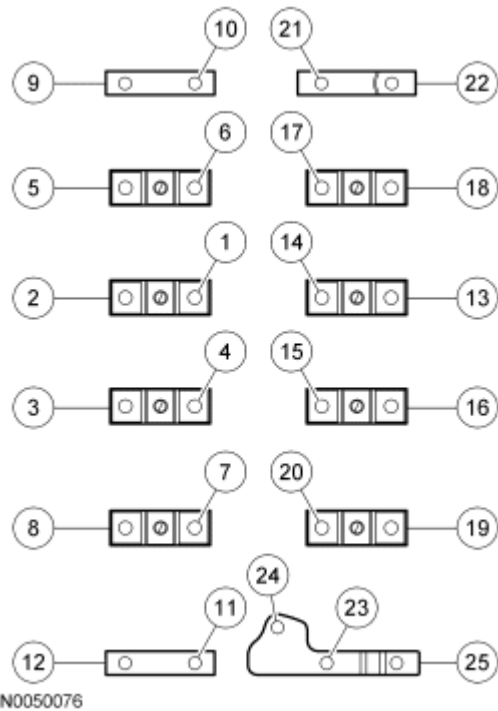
Removing Camshaft Bearing Cap Bolts In Sequence
